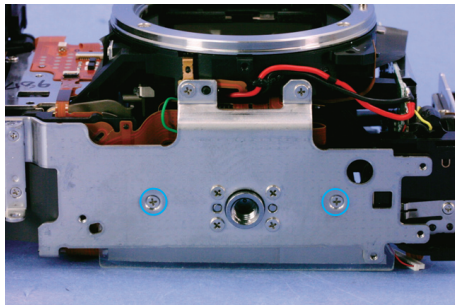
Auto Focus FPC Ass'y Assembly 7
